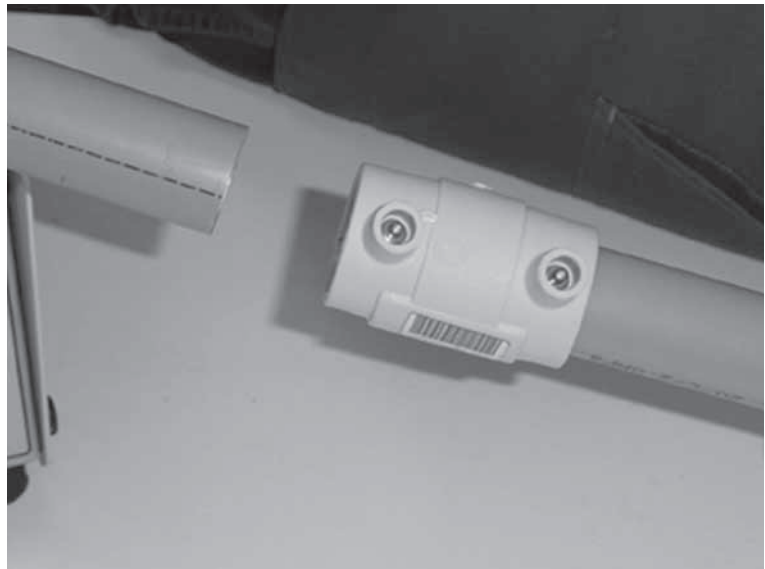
Push in the electrofusion socket art. 8271B up to the marked position on the pipe.
